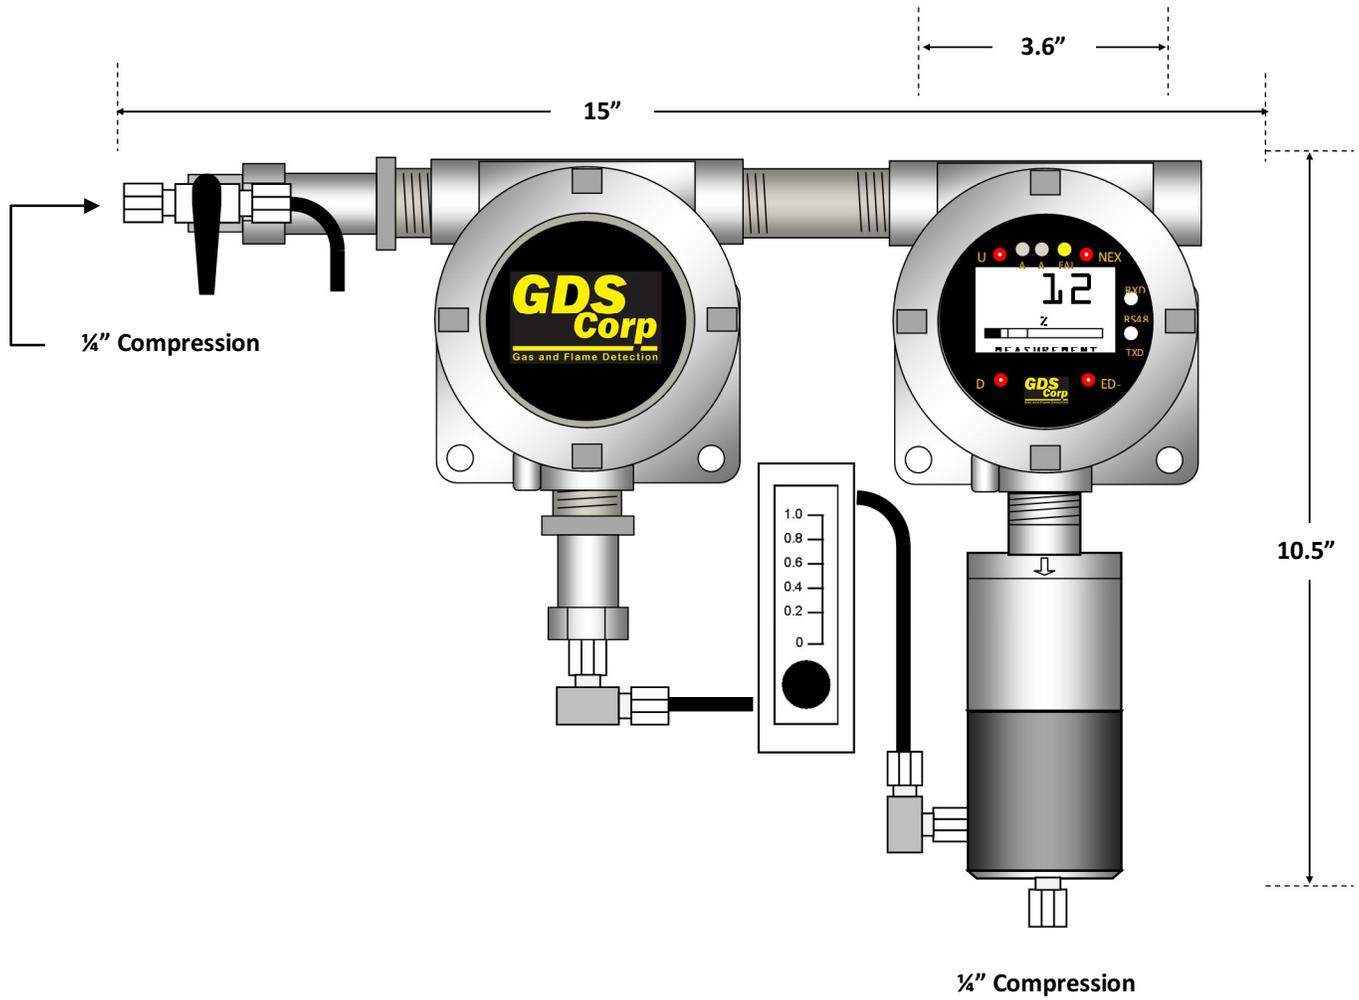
GDS-58XP Dimensions (Stainless Steel Enclosure)
